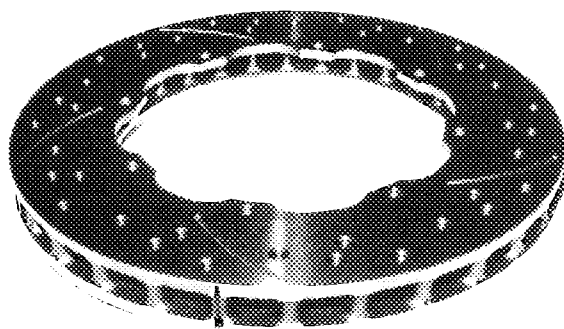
Front and/or Rear brake mounting bell, TYPE D
